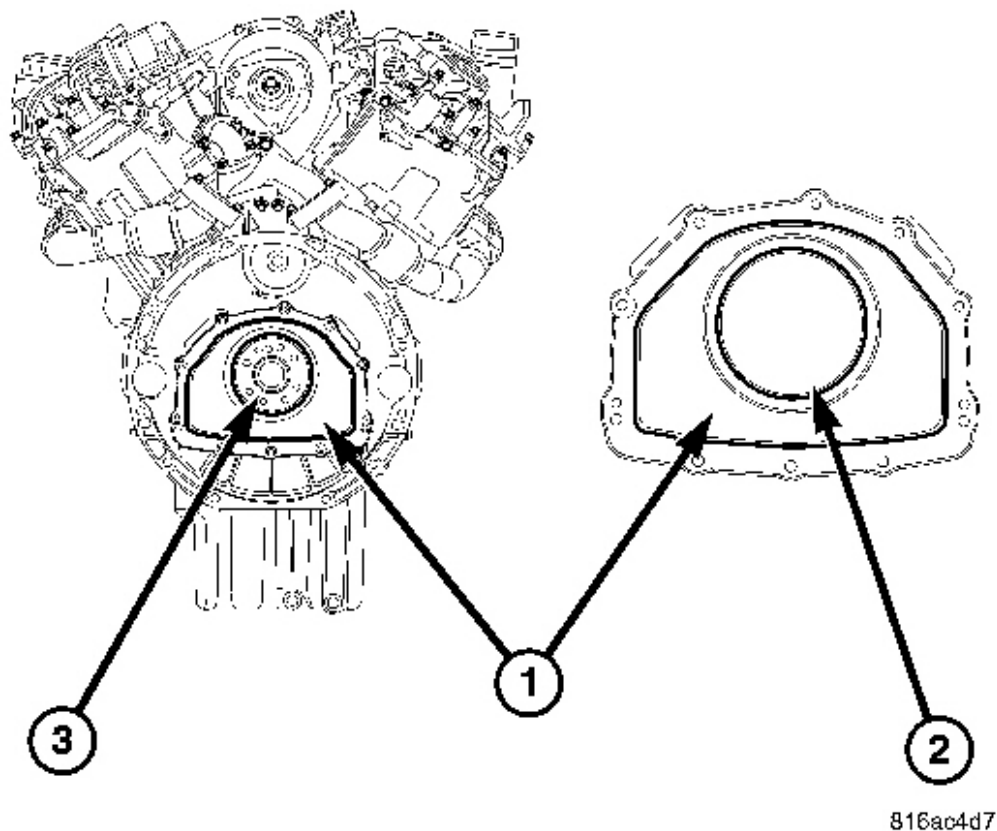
Rear Main Seal, Rear Main Seal Carrier & Crankshaft
